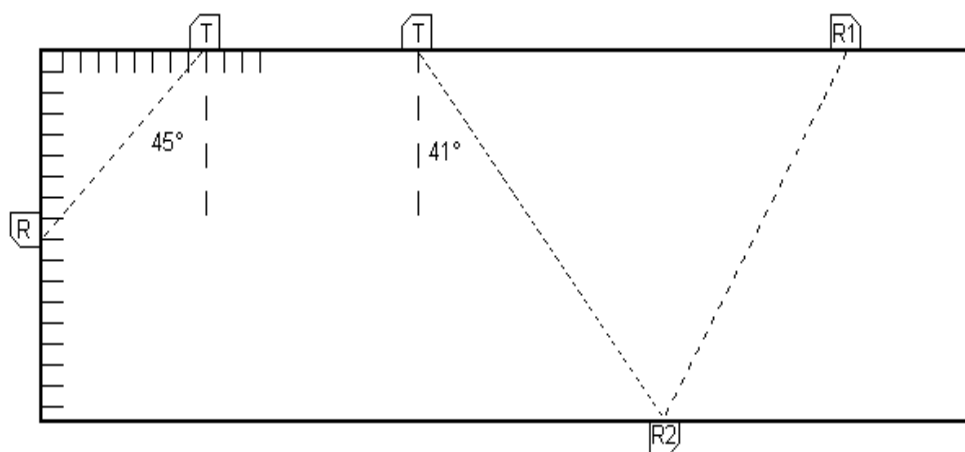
Shear wave pitch-catch technique for large bar, rod and forgings.
